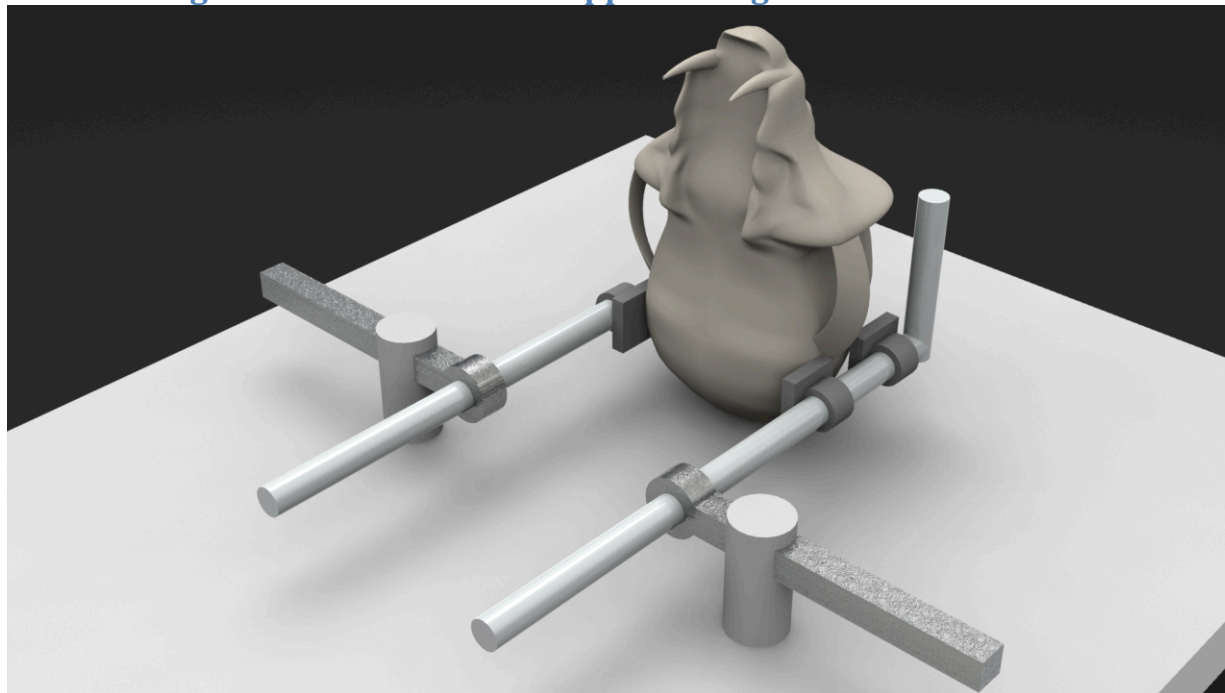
SolidWorks drawing of fork support design. Sketch produced by Gabriel Bautista.
